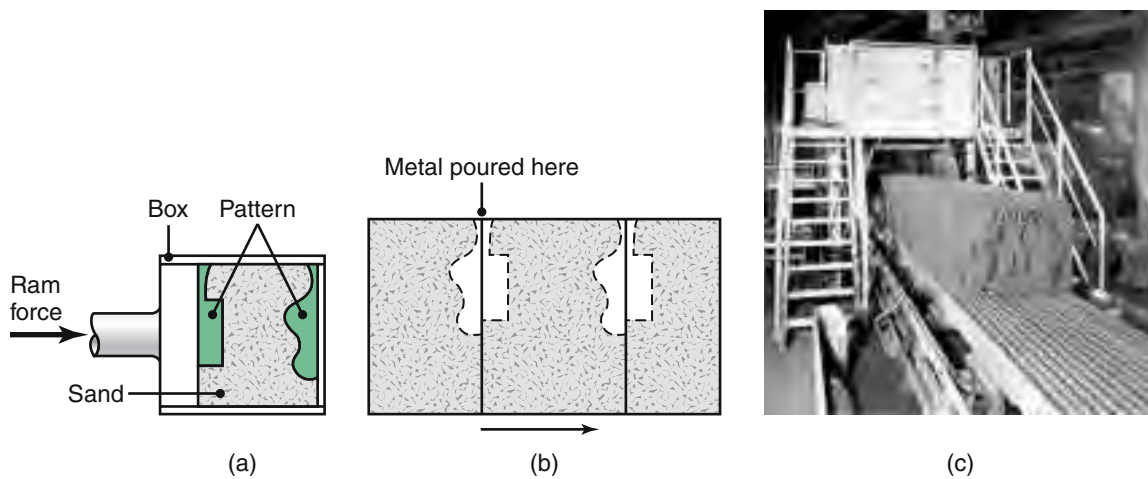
Vertical flaskless molding. (a) Sand is squeezed between two halves of the pattern. (b) Assembled molds pass along an assembly line for pouring. (c) A photograph of a vertical flaskless molding line. *Source:* Courtesy of American Foundry Society.
